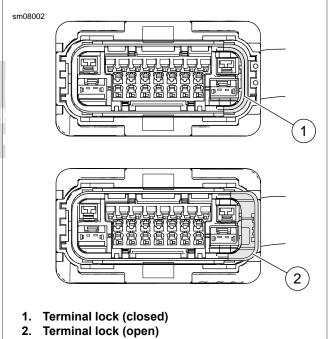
Bosch BTC Sealed Connector Terminal Lock
